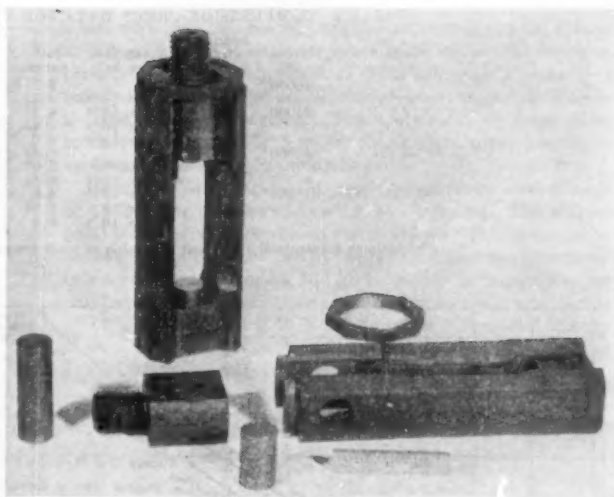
SPECIAL COMPRESSION FIXTURE FOR TENSILE MACHINES
